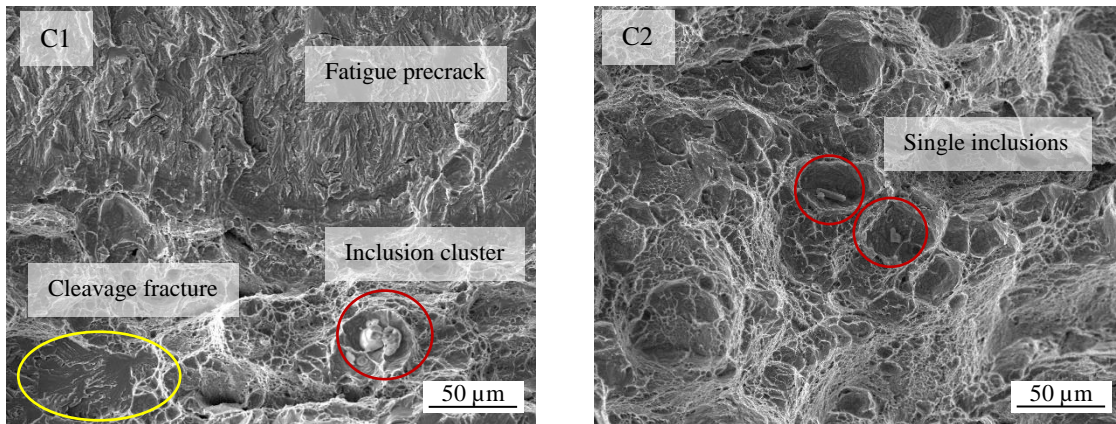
Fracture surfaces of C1 and C2 after testing.
